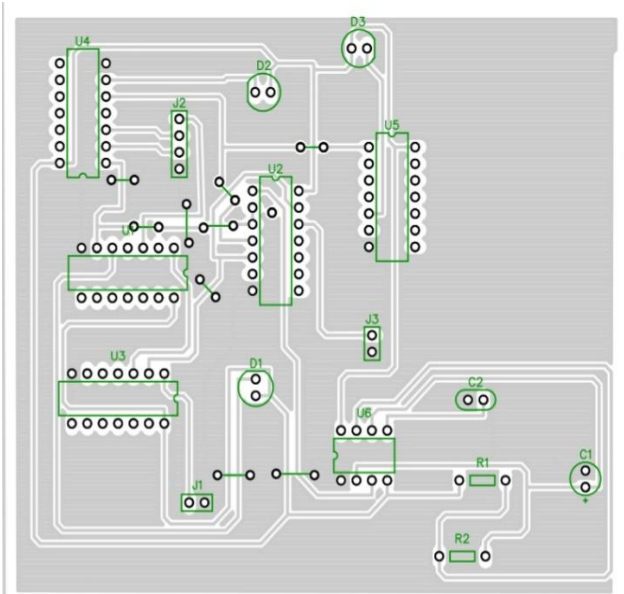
PCB layout of Heat –Cool Stepping and Gating Circuit
